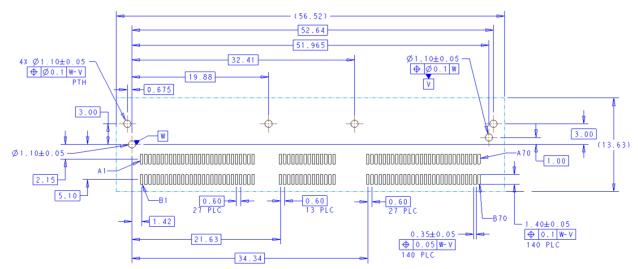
4C RIGHT ANGLE CONNECTOR FOOTPRINT
